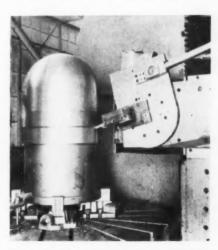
This close-up shows the mounting plate with the grinding wheel removed and toolholder mounted for precision machining.
